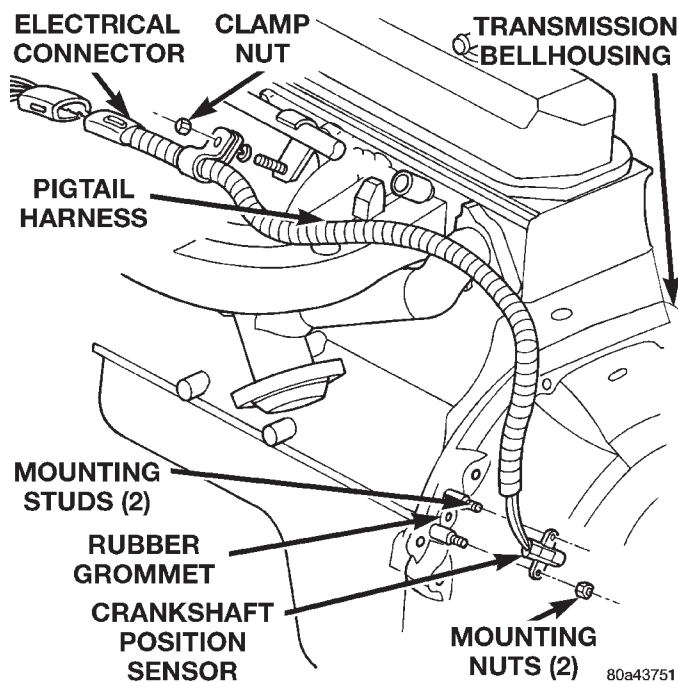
Crankshaft Position Sensor—2.5L Engine
